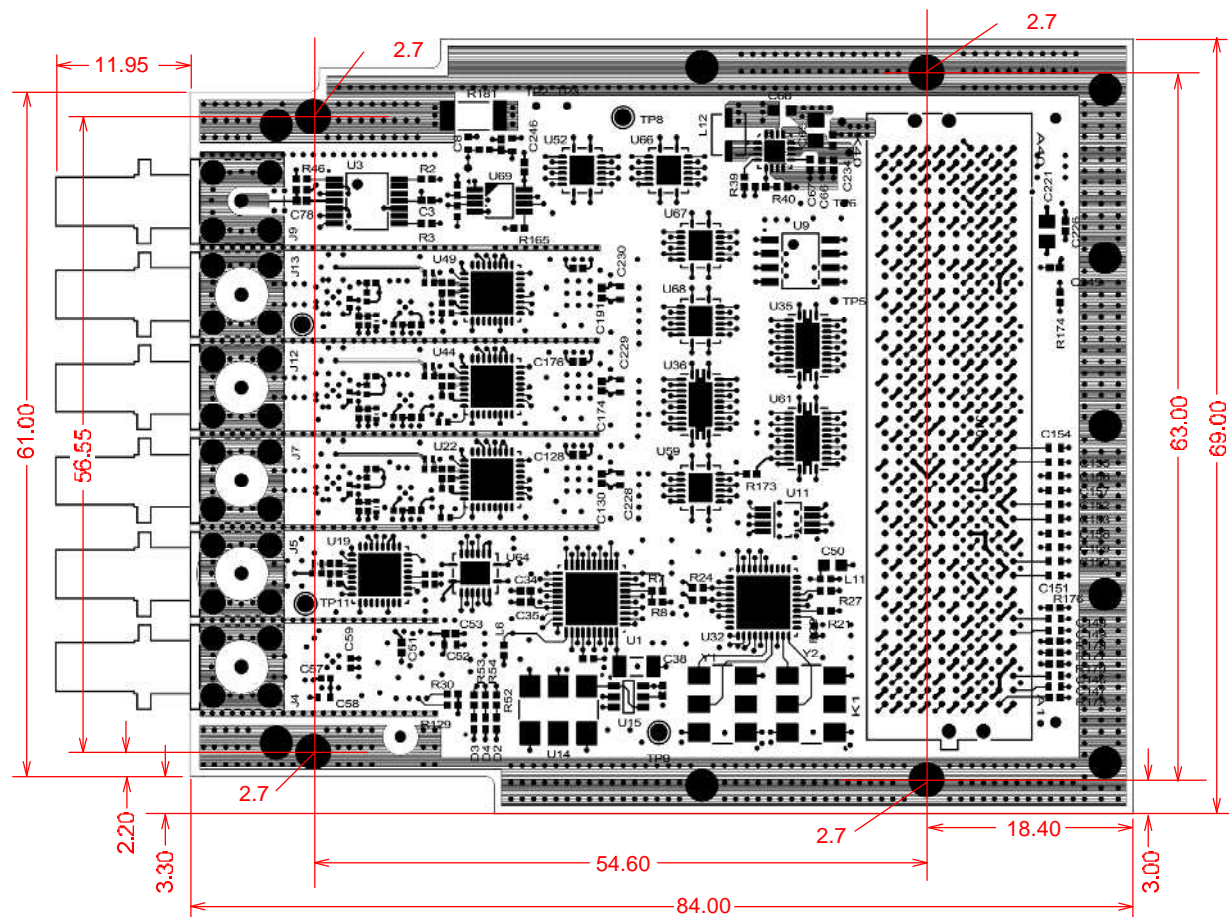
TB-FMCH-12GSDI Board Dimensions (mm)
